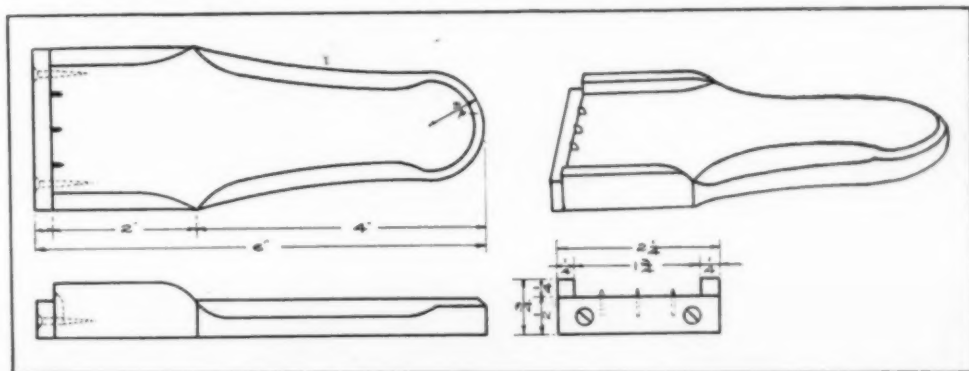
A WORKING DRAWING SHOWING HOW TO MAKE A GAUGE FOR CUTTING SPLINTS.
